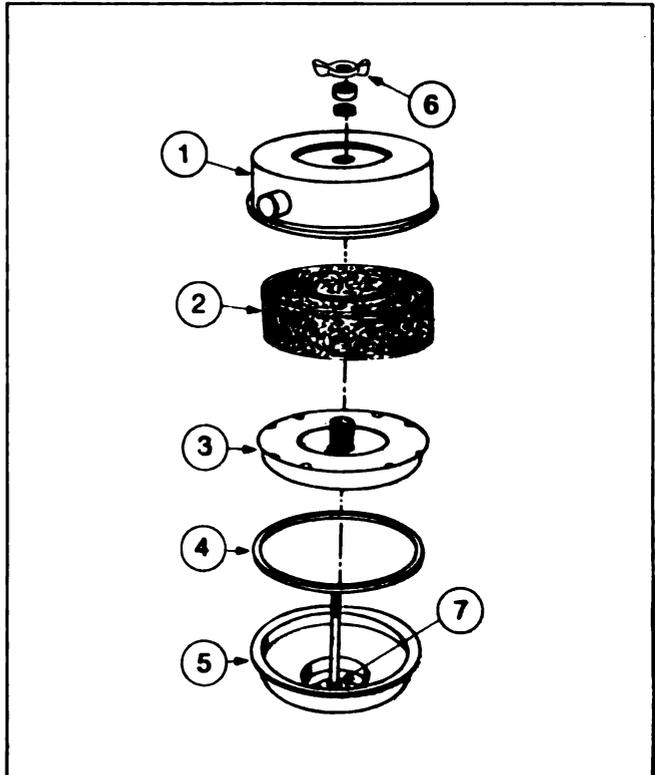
(V51909). Crankcase breather — mesh element with vapor barrier
